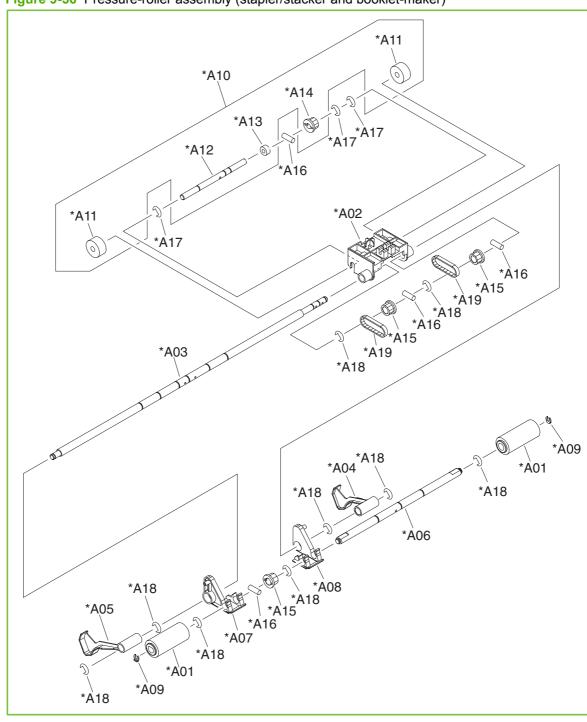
Pressure-roller assembly (stapler/stacker and booklet-maker)
